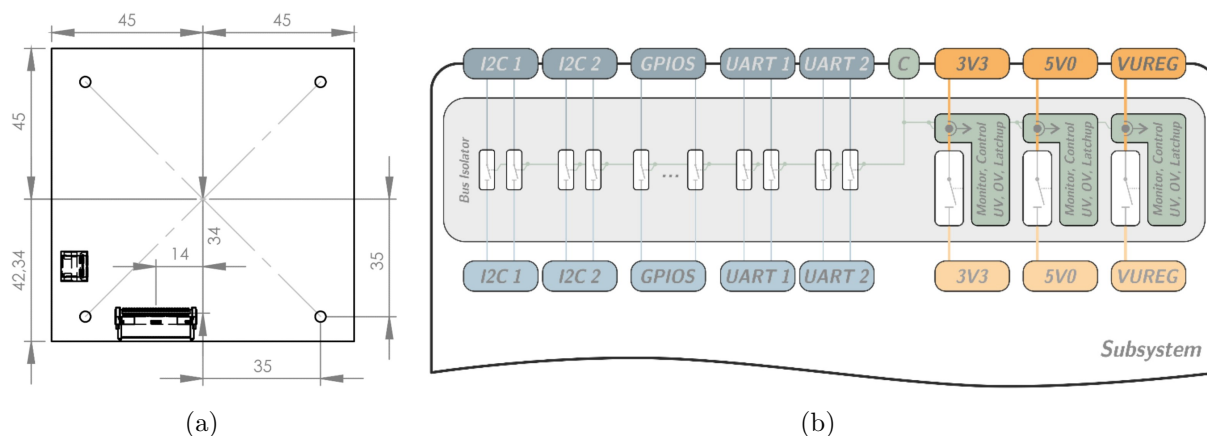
The mechanical (a) and electrical (b) UNISEC interface [67] used in QUBE. Except for the bus isolation parts (see figure 3.2 (e)), front and back part of the PCB can be freely fit with electronics components. Resulting hardware is shown in figure 3.2 and figure 3.6.
